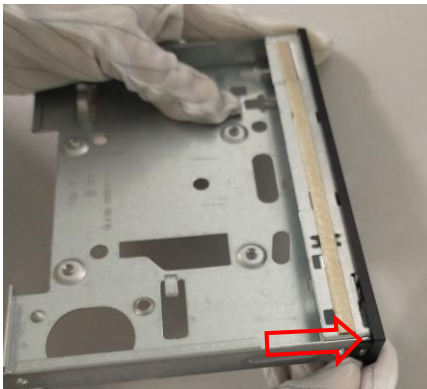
Loosen the 2pcs bottom side hooks of switch card panel
